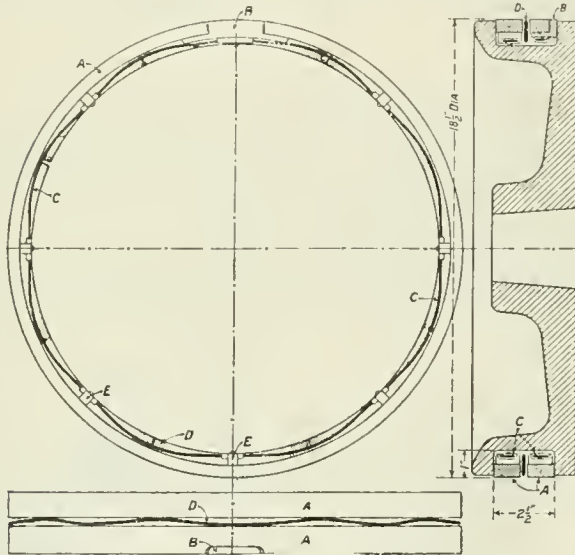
ROWAN LOCOMOTIVE PISTON PACKING RINGS
